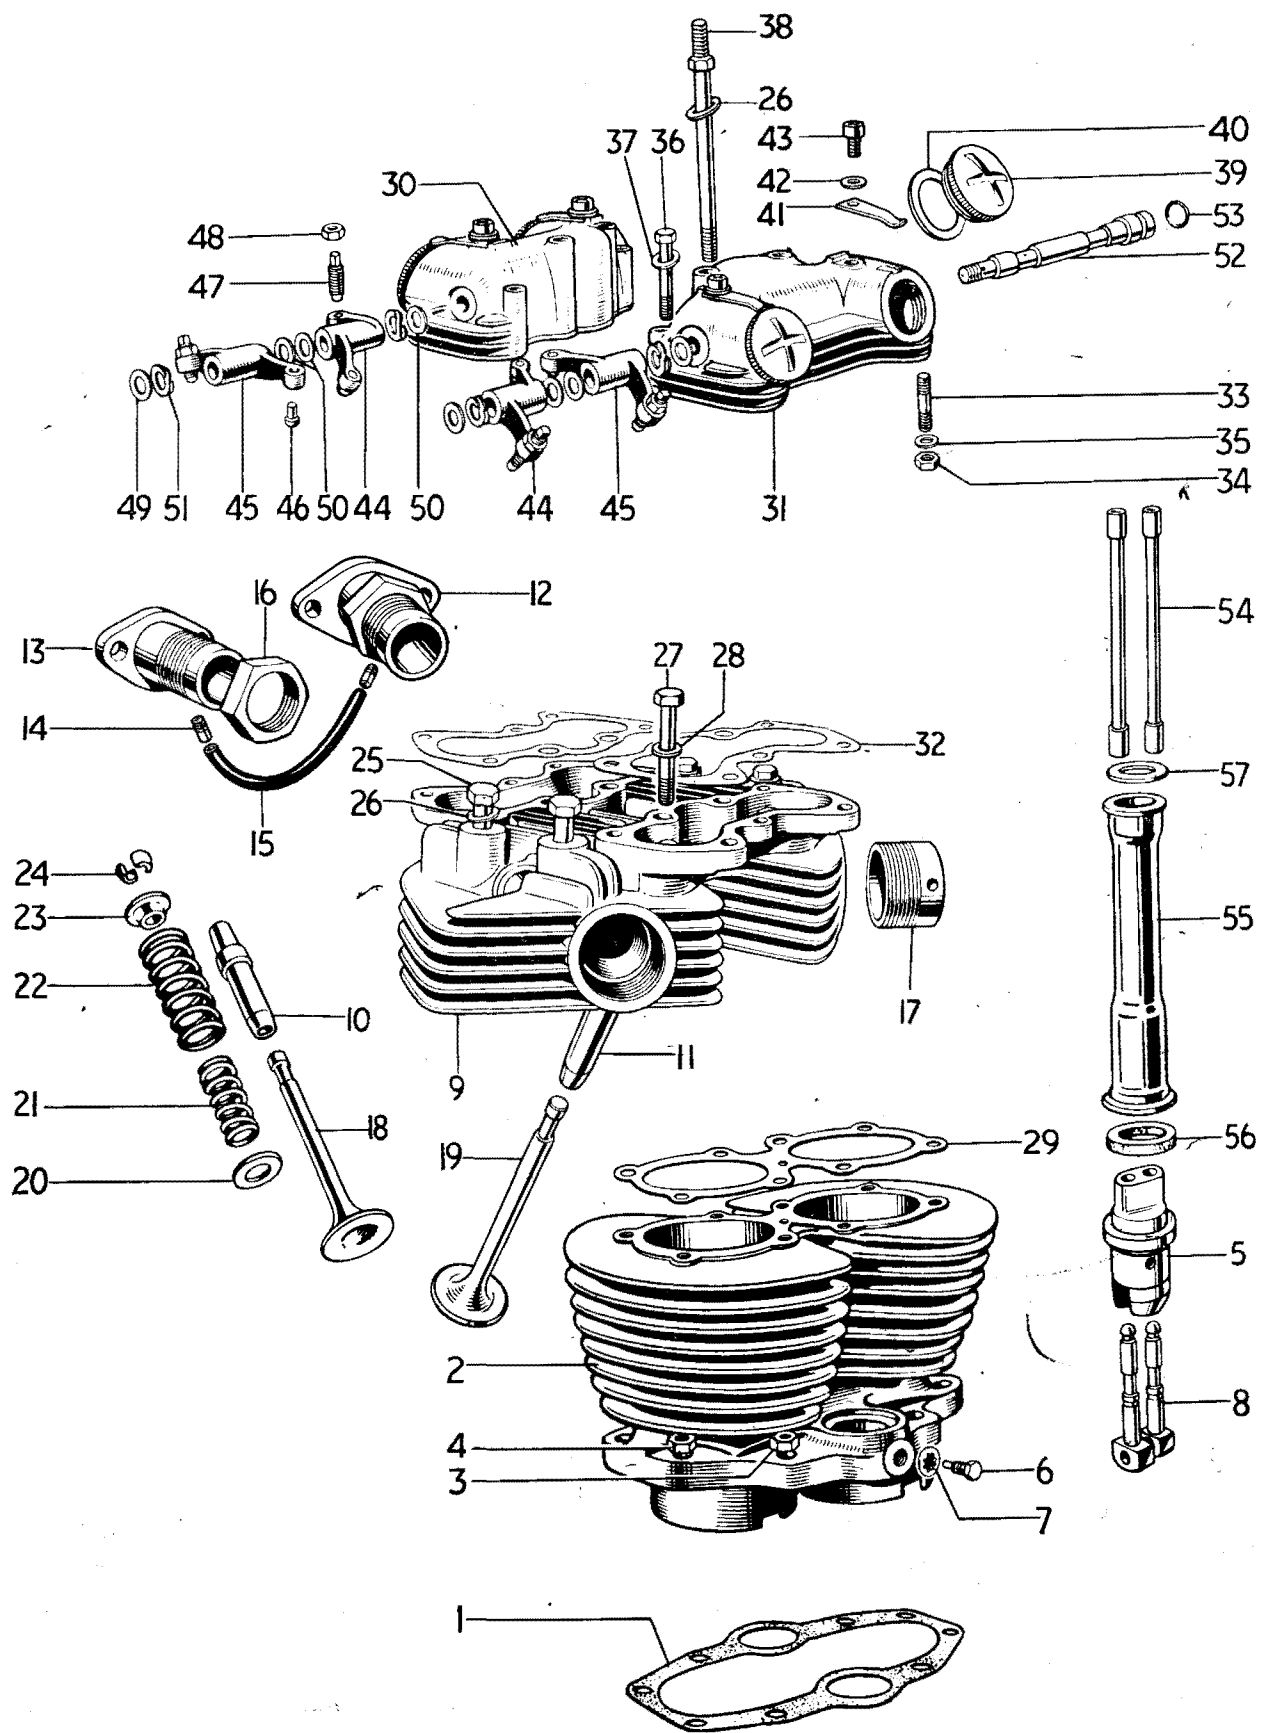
CYLINDER BLOCK AND HEAD, T120
